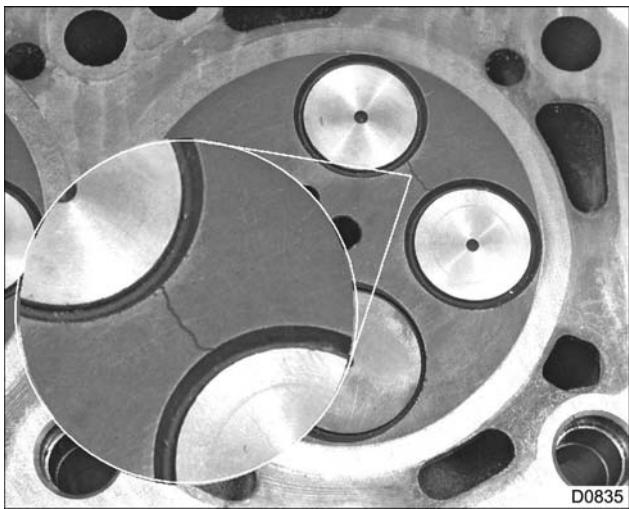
Cylinder head crack between intake and exhaust valves (typical)
